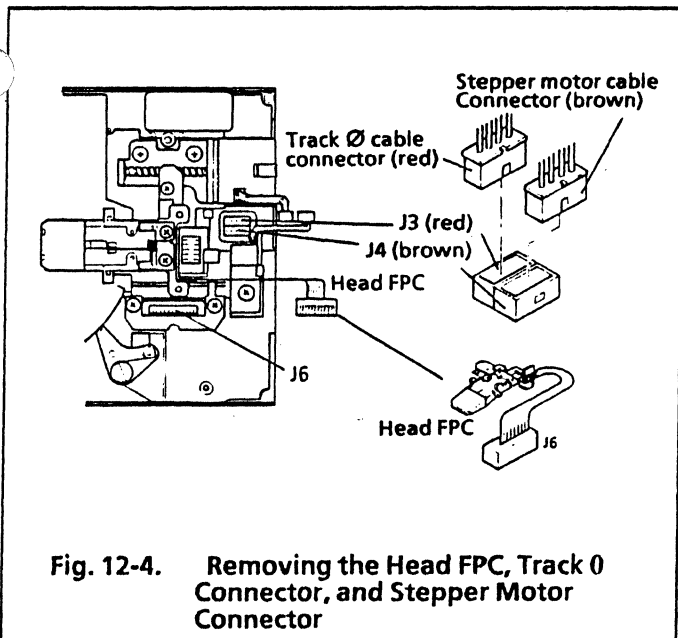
Removing the Head FPC, Track 0 Connector, and Stepper Motor Connector
